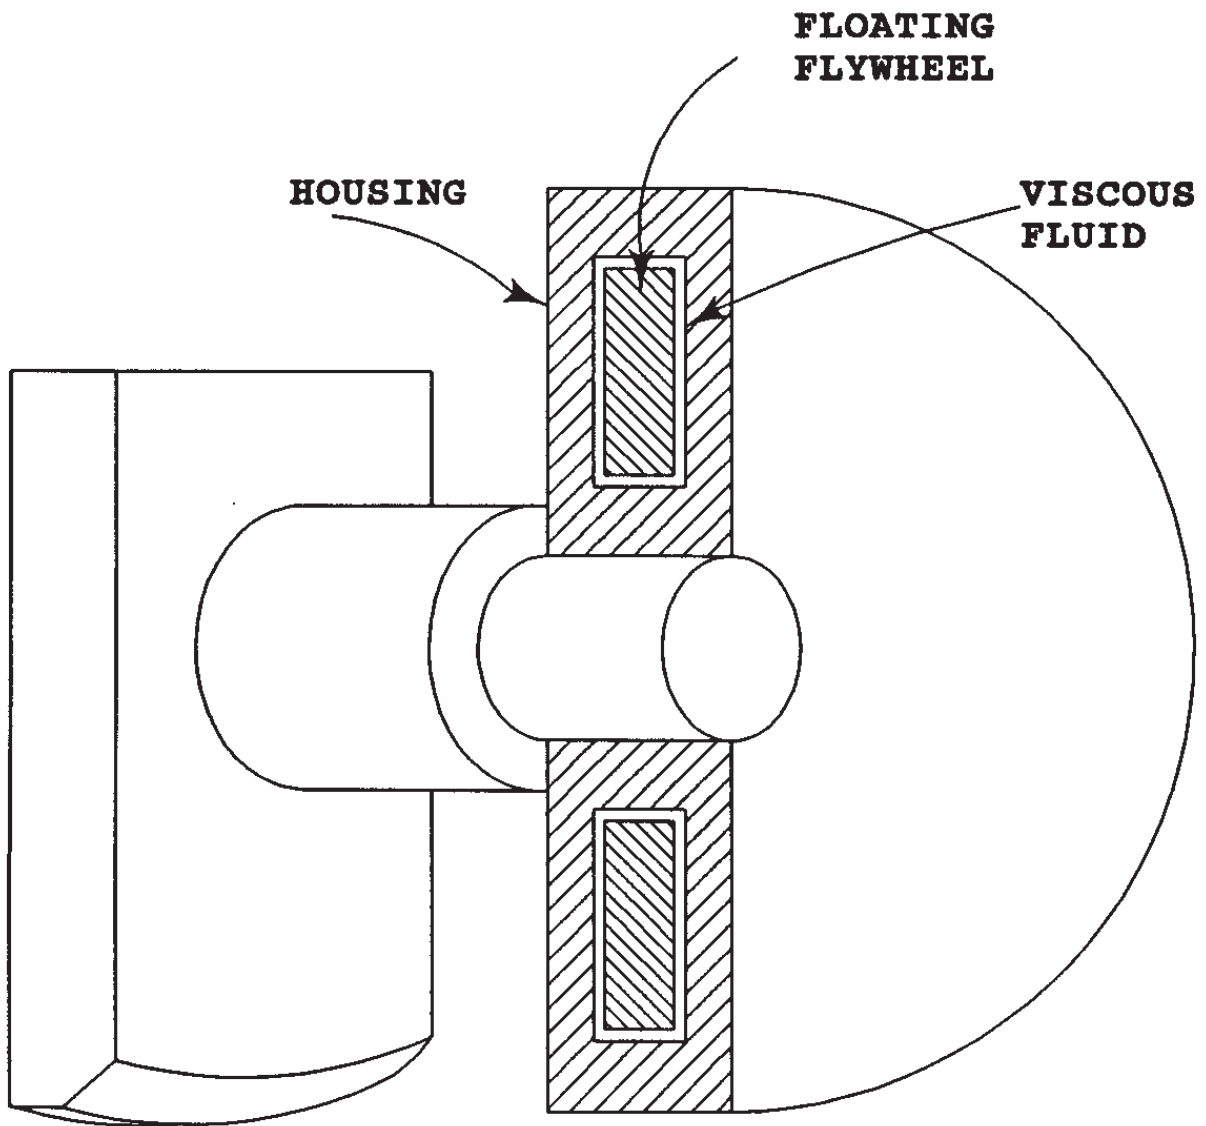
Vibration Damper on Free End of Crankshaft
